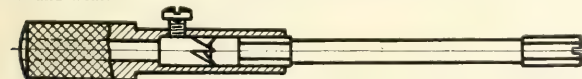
USE OF UPPER VALVE STEM SCRAPER
